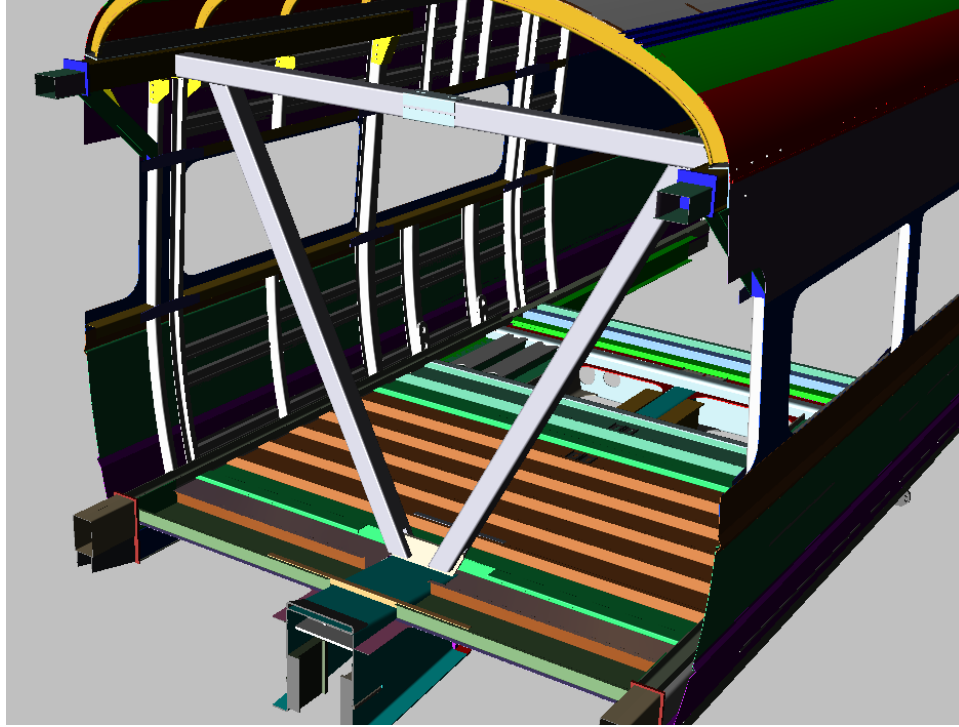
Built-up tube welded to doublers for longitudinal load path into roof rail
